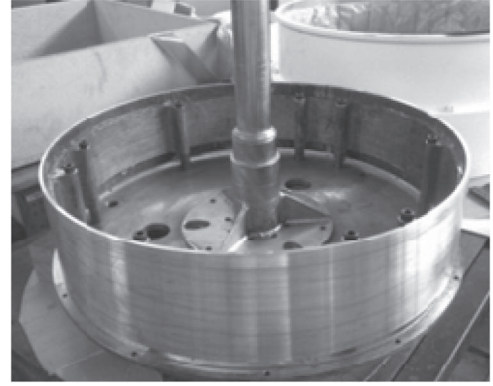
Slip rotor assembled on front-plate with shaft connected.
